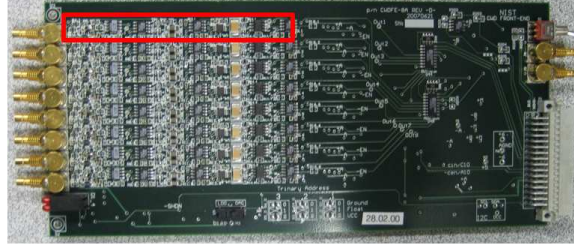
Eight lock-in amplifier channels are included on one PCB with up to 16 PCBs in a single chassis allowing for probe arrays of up to 128 elements.
